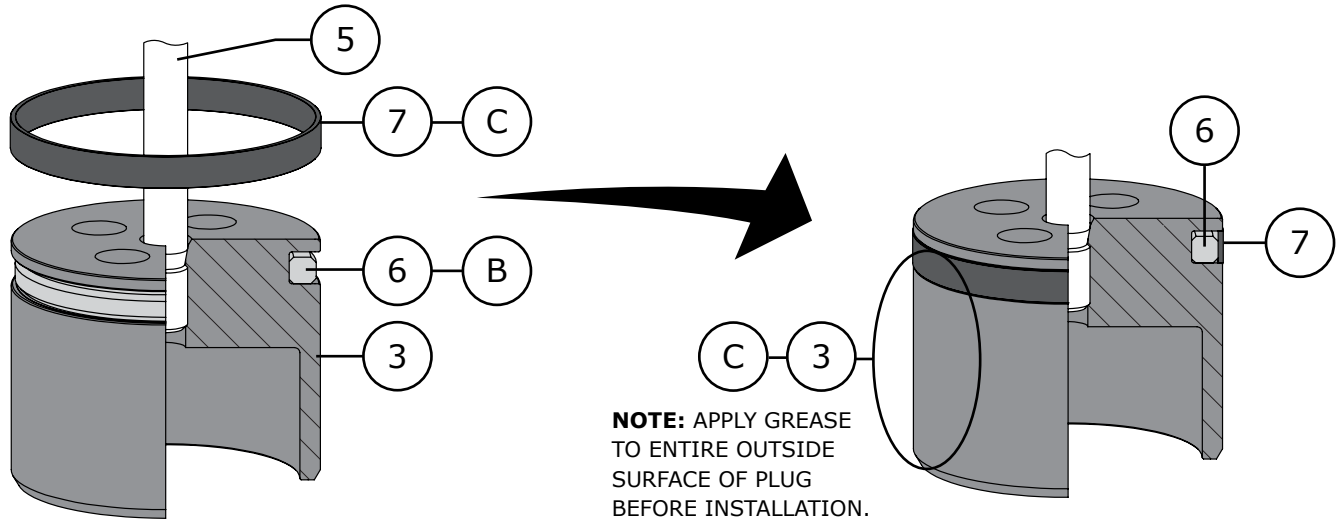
Two-Piece Plug Seal Assembly (Model 360 Only)
